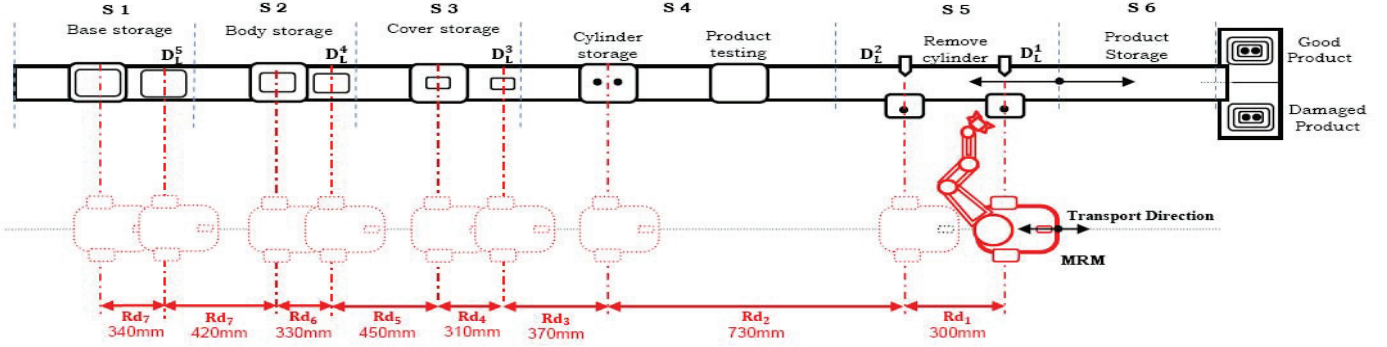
Assembly/disassembly line of a product consists of 5 components, served by the WMR equipped with RM
